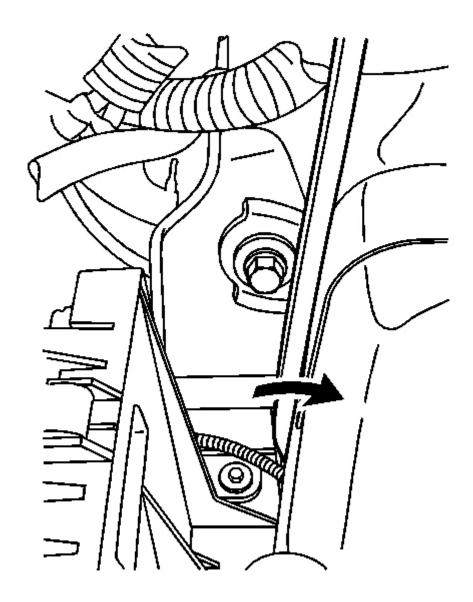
Accessing Forward Facing Bolt Courtesy of GENERAL MOTORS CORP.
